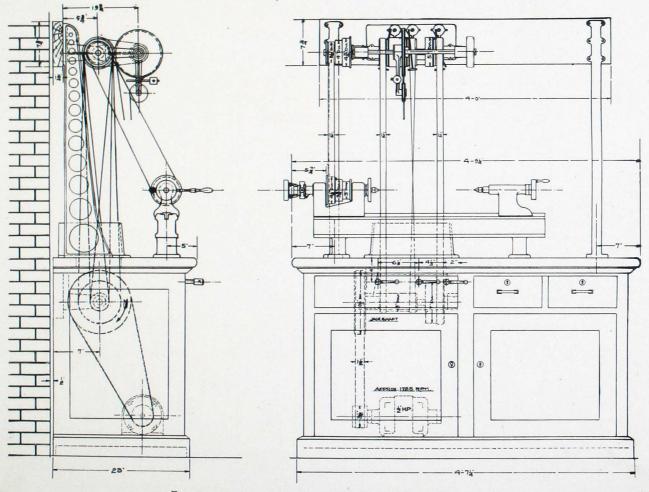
Lathe on Cabinet, Individual Motor Drive.
